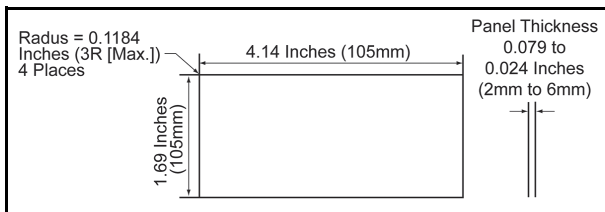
Taiko Bezel Cut-Out Dimensions
